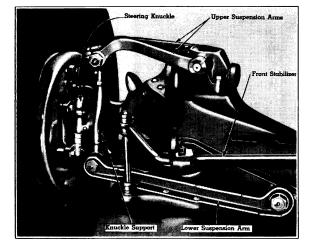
Steering Knuckle and Support Series 40-50, 52, 62, 72 and 60S
